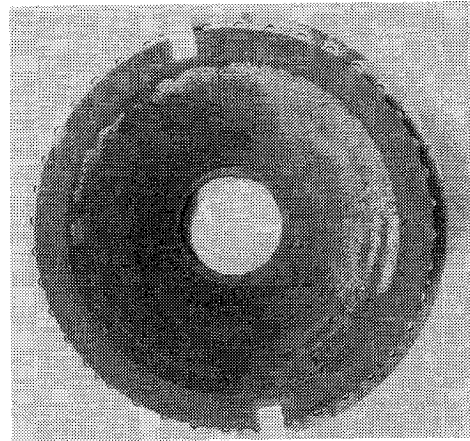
Post-test exit cone view of SAA-2 nozzle assembly.
